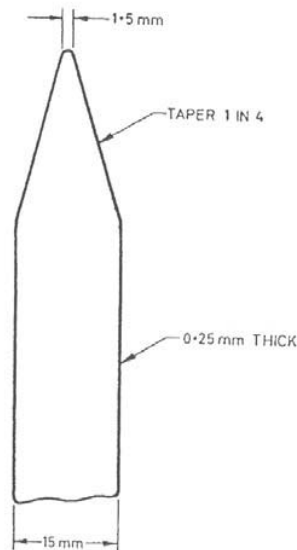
GAUGE LEAF FOR MEASURING CRACKS
